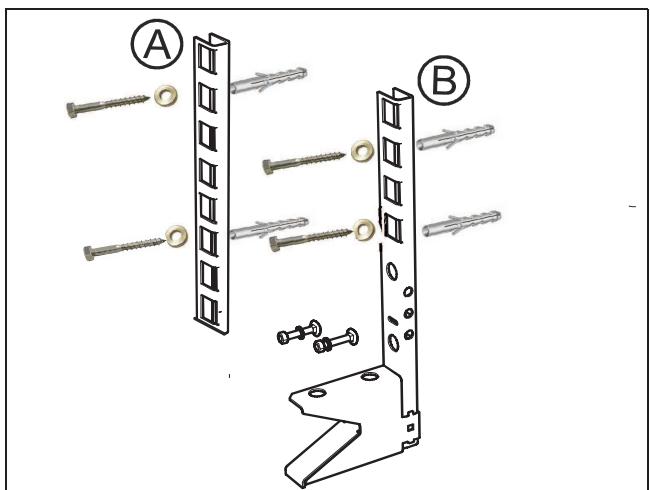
Accessories supplied: wall bracket and wall/floor bracket WKO18
